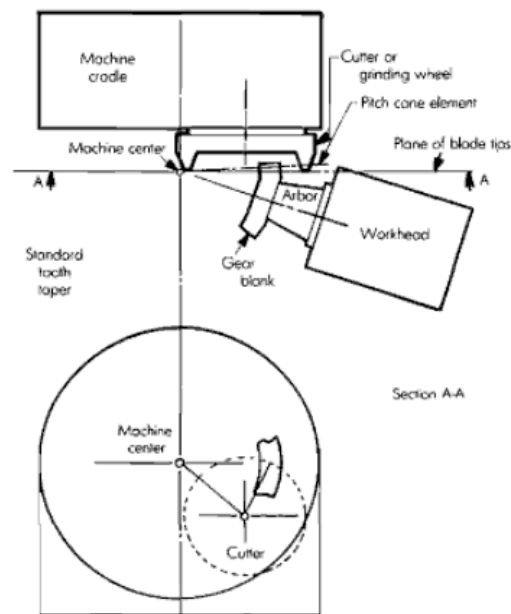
BASIC CONFIGURATION OF MACHINE FOR GENERATING BEVEL GEARS
